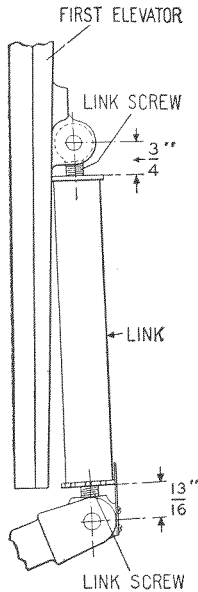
Diagram showing the link which connects the first-elevator lever to the first-elevator slide and gives the distances for adjustment, which ordinarily are right in the machine when first set up.
